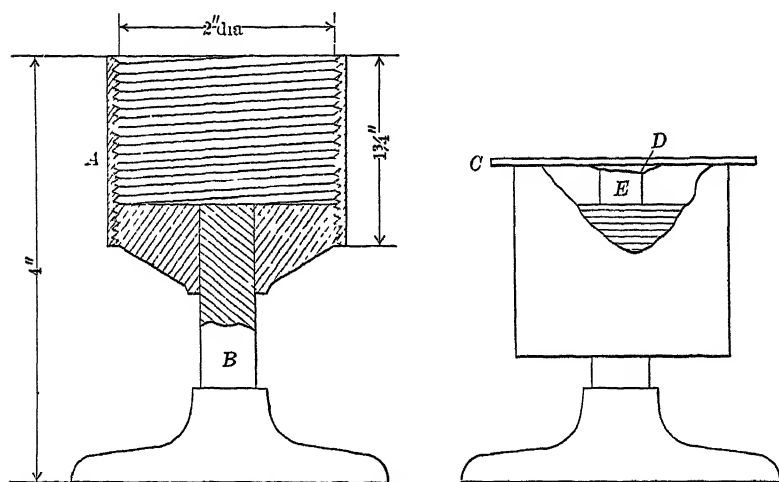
DEVICE FOR MOUNTING SPECIMENS.
